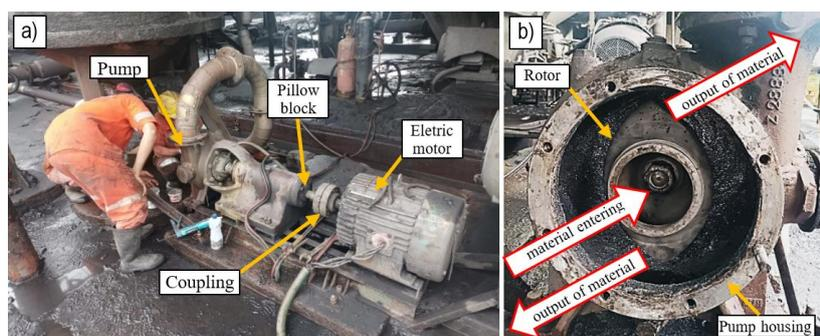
Centrifugal pump assembly a) external view and b) internal view.
